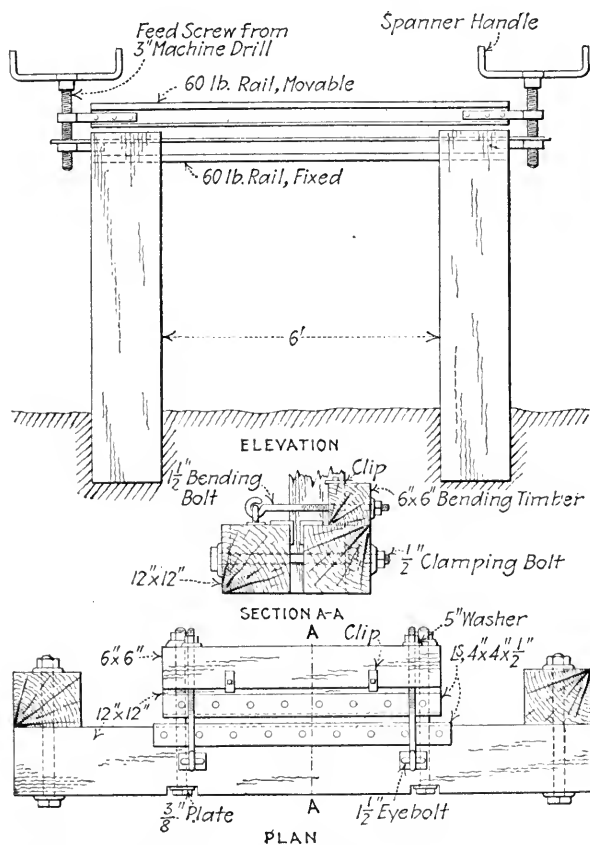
CLAMP AND BENDING DEVICE FOR STEEL PLATES.
